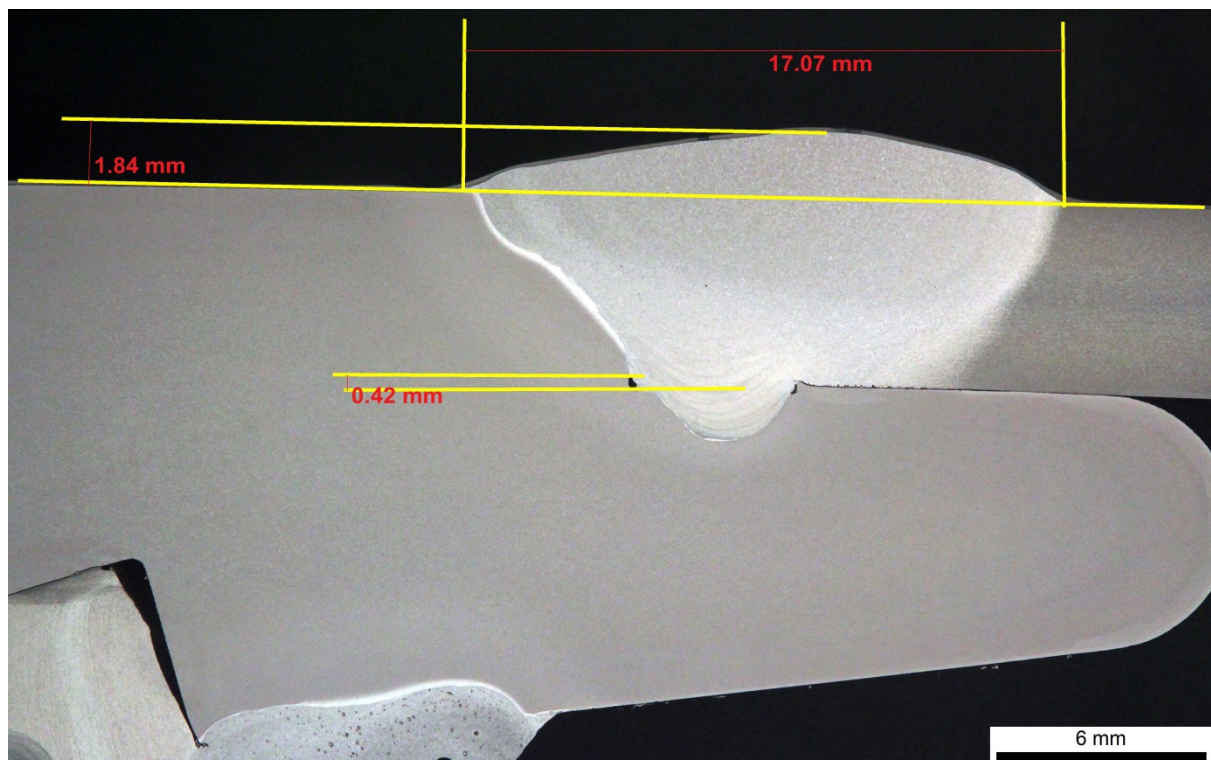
J3564 sample W07-08, slice 4, right hand side of Figure I84. Lack of side wall fusion, volumetric defect at weld root.
